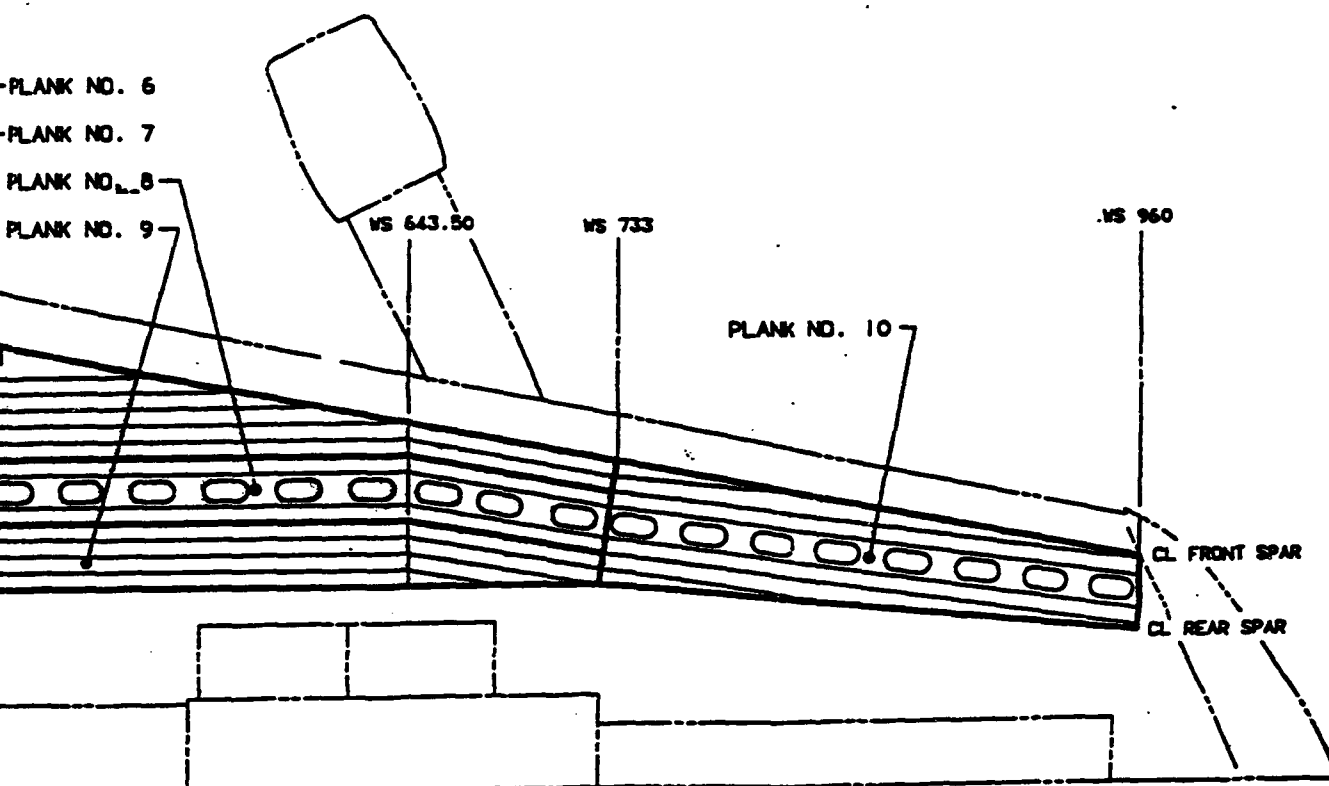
Wing Planks And Stringers, Lower Surface, Right Hand Side Wing.
